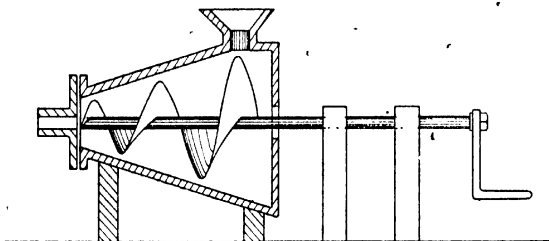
Sausage Machine for Gelatinized Explosives.
